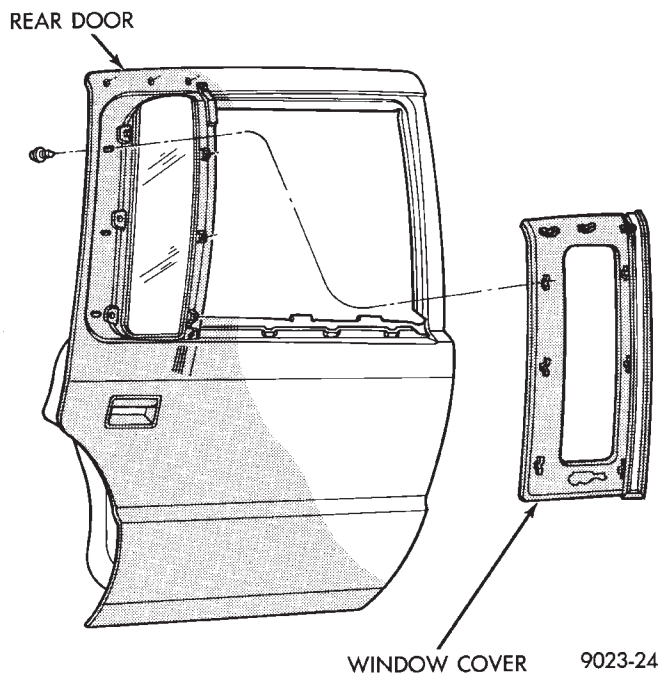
Rear Door Fixed Glass Outer Cover—AY-S Body
